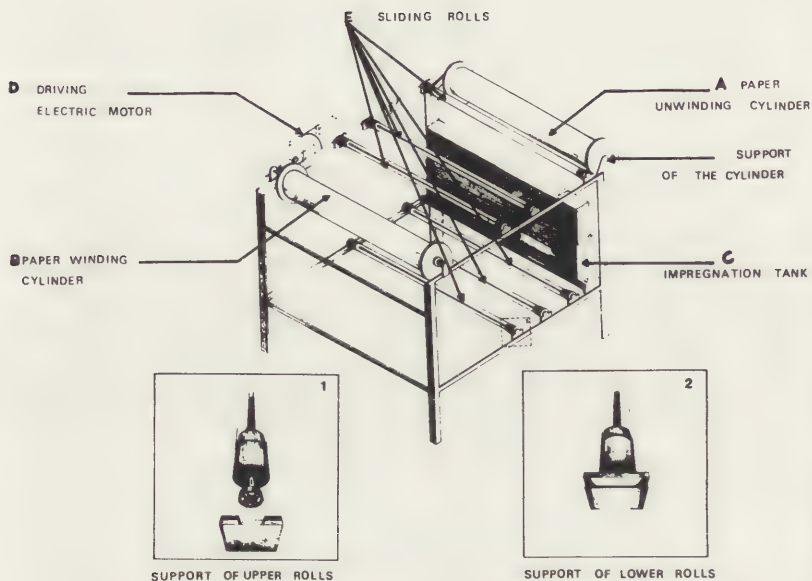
Apparatus for paper impregnation and details of volving bearings.
